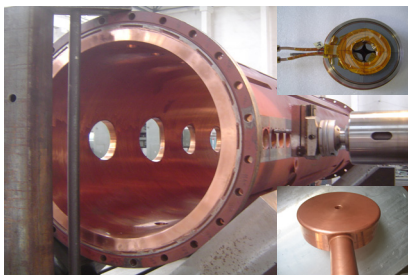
The DTL tank and quadrupole in drift tube of bulk copper.
